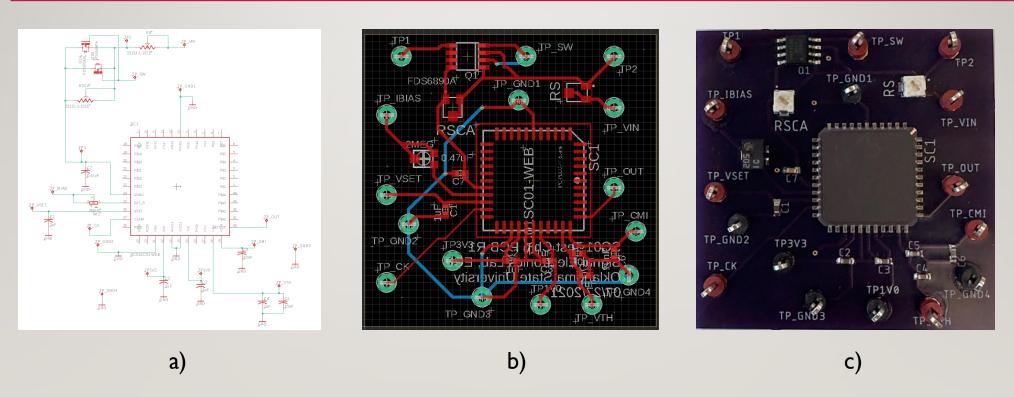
PCB design for test chip in EAGLE a) Schematic b) Board layout c) Fabricated board
